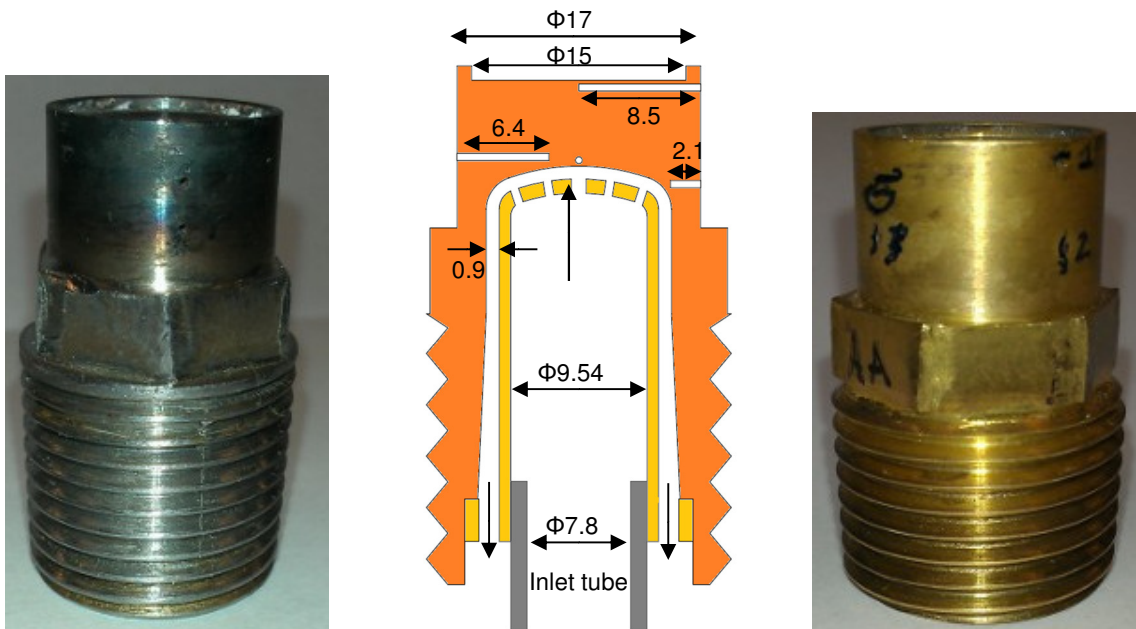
Drawing of the HEMJ thimble with inserted jet cartridge (center). Steel thimble (left), brass thimble (right). Dimensions in mm.
